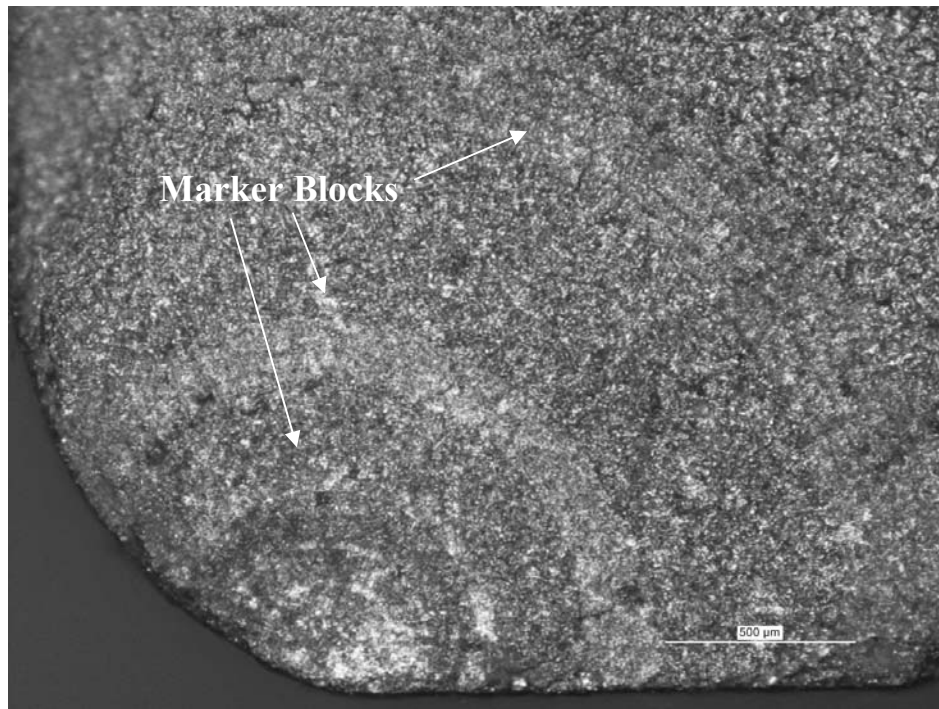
Fracture Surface of Critical Crack on Specimen #19
